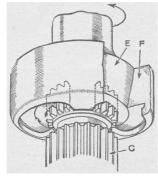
Cone clutch, dogs and splines incorporated in the synchro-mesh mechanism. (Courtesy of "The Autocar")
